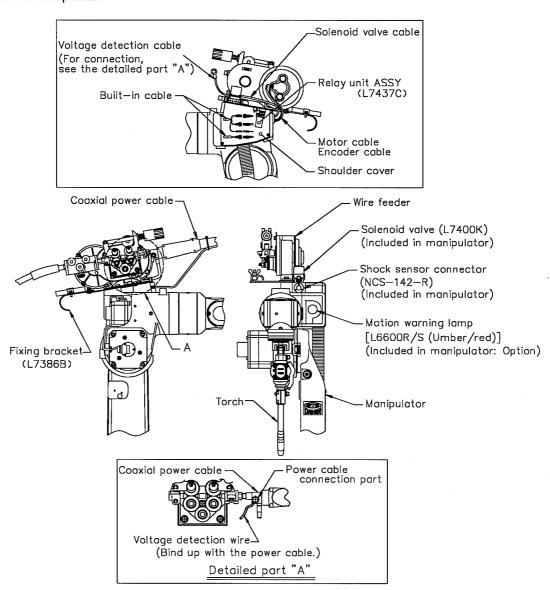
Mounting on manipulator "Almega AX (EX)-MV series robot"
